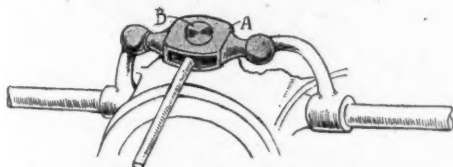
FAFNIR BRAKE ADJUSTMENT
